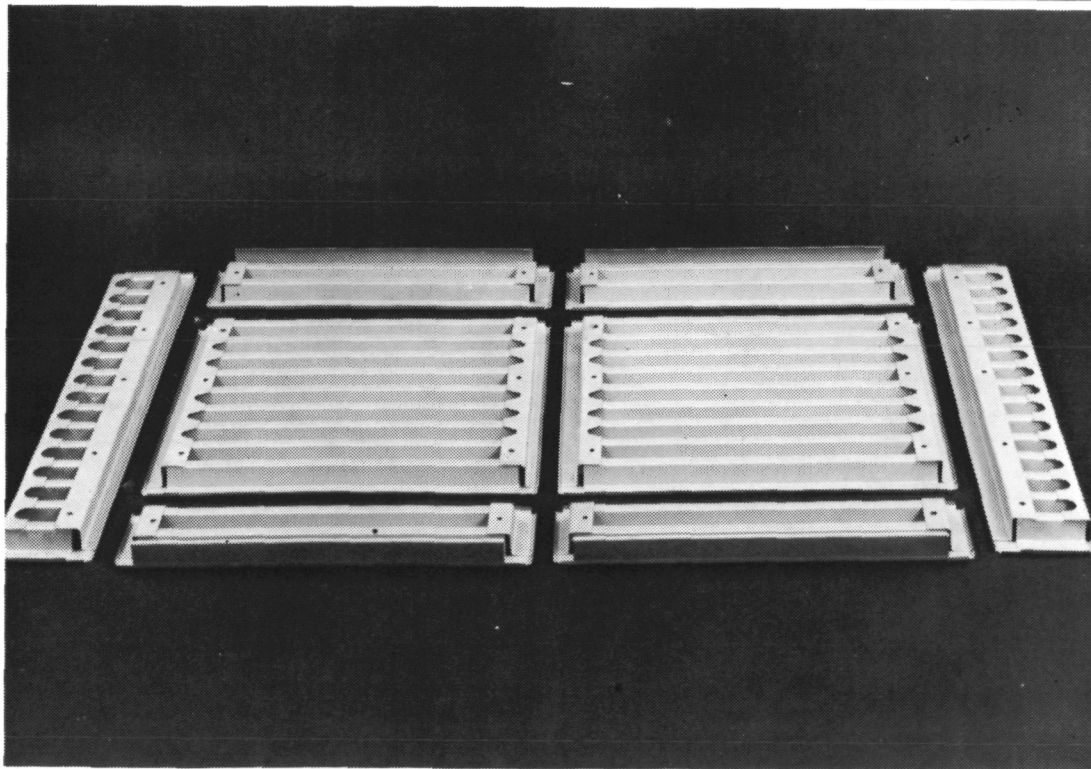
Completed TD Ni-20Cr Heat Shield Panels — Inner Surface
